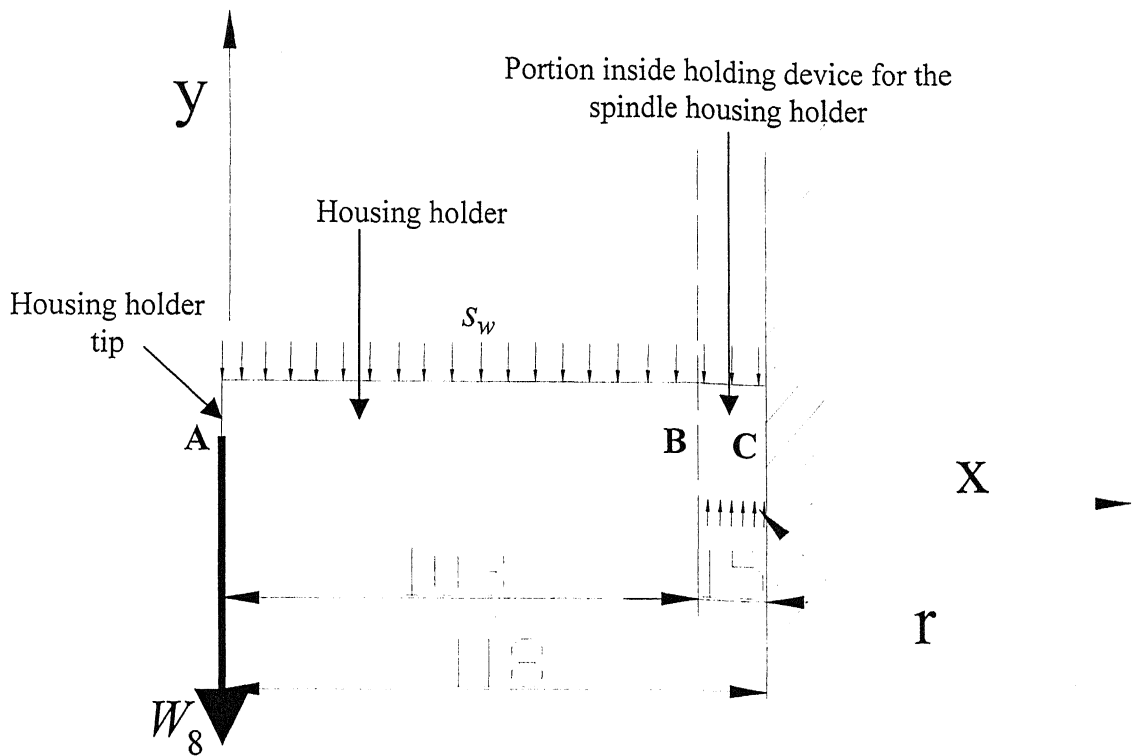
Schematic view of the loads acting on the spindle housing holder
